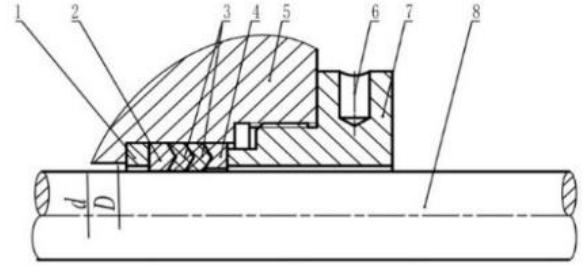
Hydraulic end three-stage sealing device design of 7000 fracturing plunger pump: 1 - Support ring; 2 - Rubber ring 1; 3 - Rubber ring 2; 4 - Junk ring; 5 - Pump head; 6 - Radial hole; 7 - Packing gland nut; 8 - Plunger
